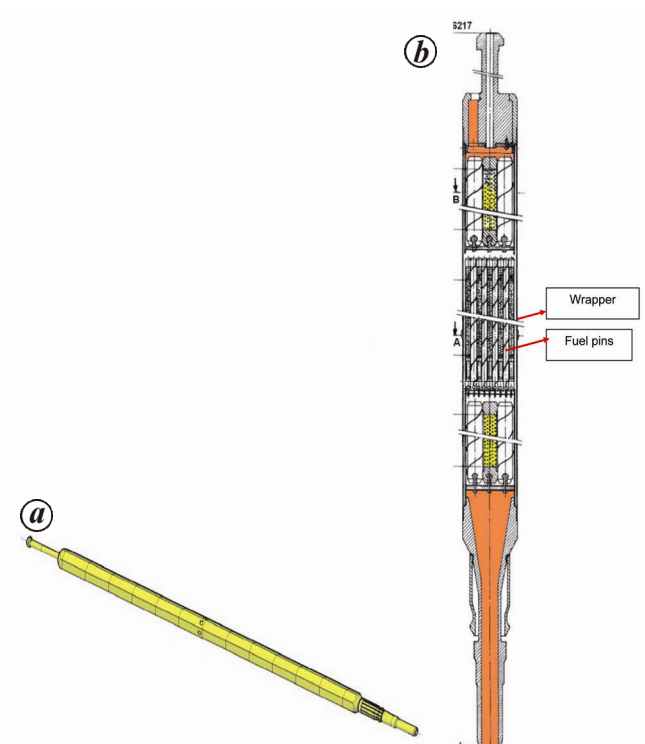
a*, View of the FBTR subassembly. *b*, Cutaway view of FBTR fuel subassembly.
